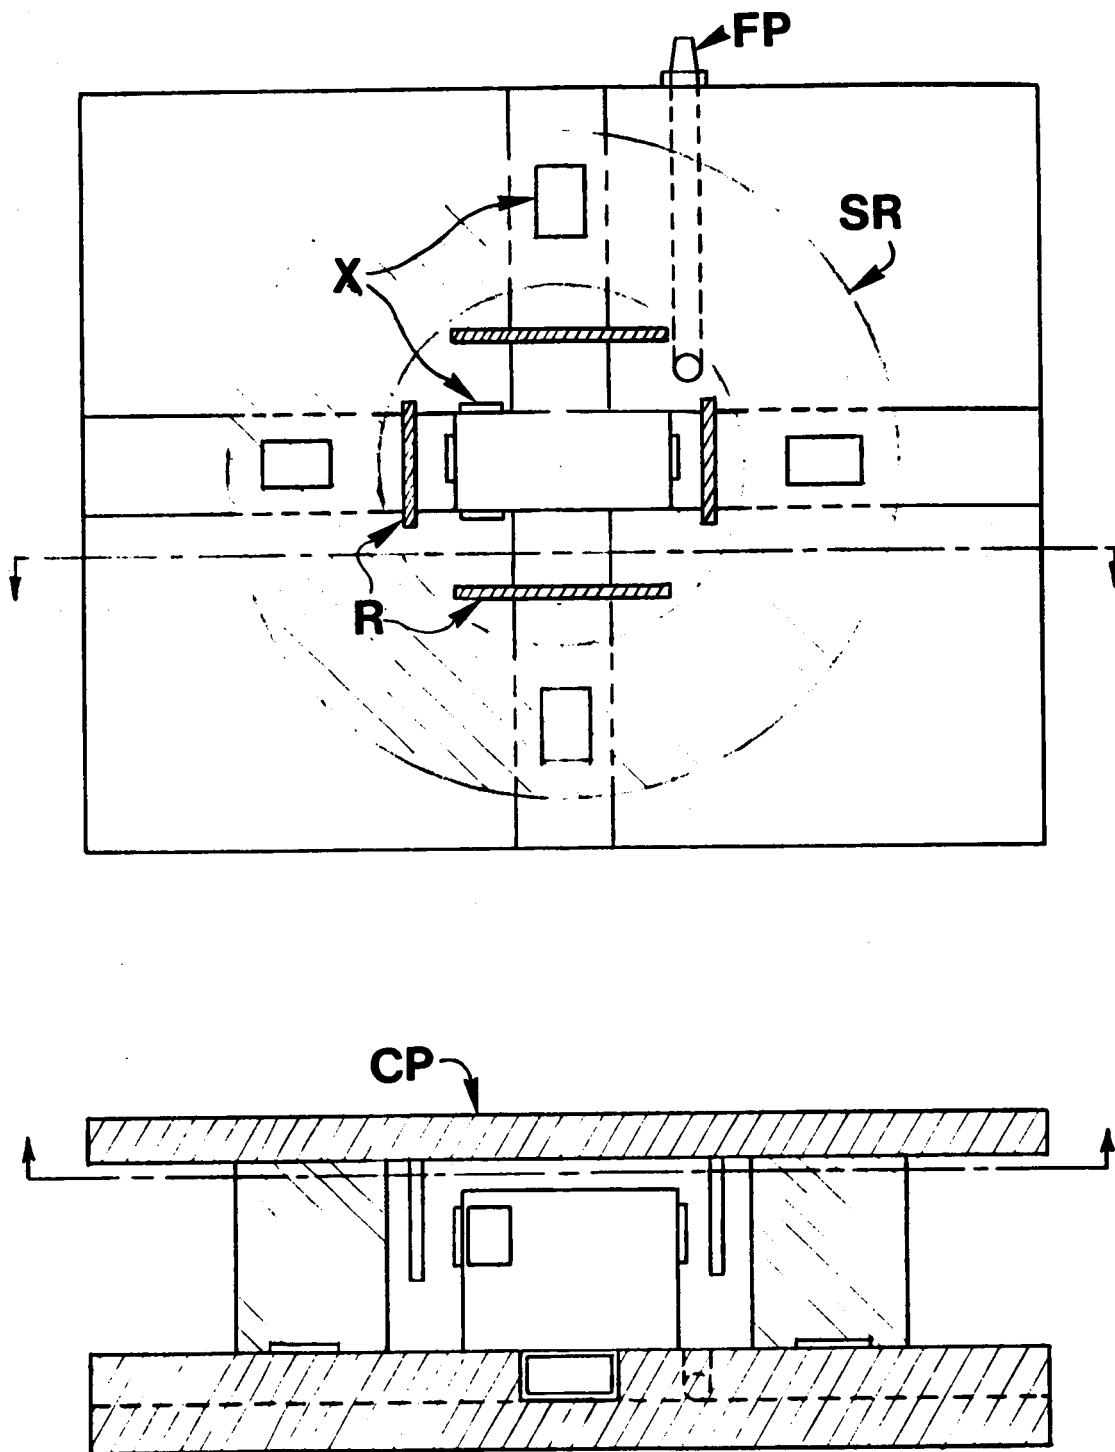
Prototype Force-Torque Sensor. X, brass tube mounted transducers; R, reflectors; SR, silicone rubber ring; FP, filling port; CP, cover plate.
